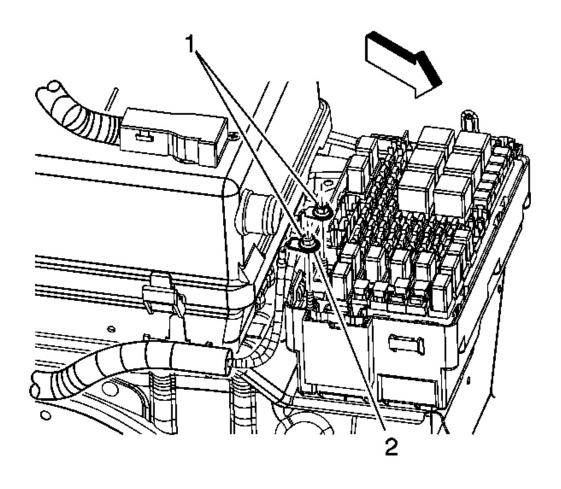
Nuts Securing The Battery Cables To Underhood Fuse Block Courtesy of GENERAL MOTORS CORP.
